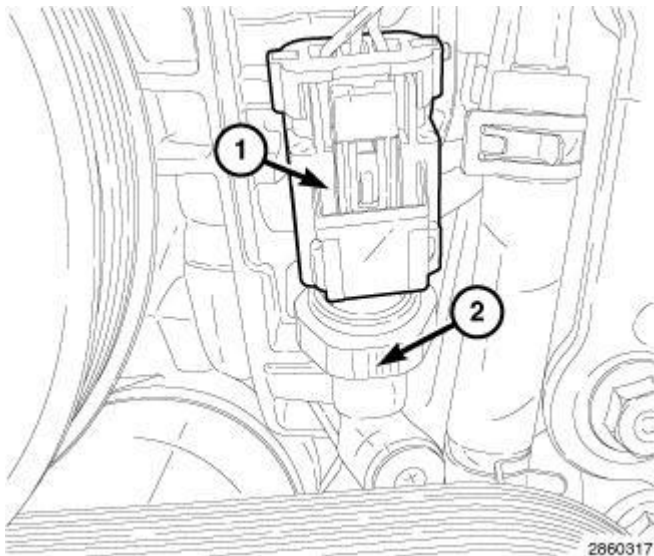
Oil Pressure Switch Harness Connector & Oil Pressure Switch
